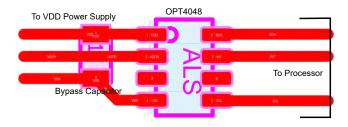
Example PCB Layout with the OPT4048 SOT-5X3 (8) Package
